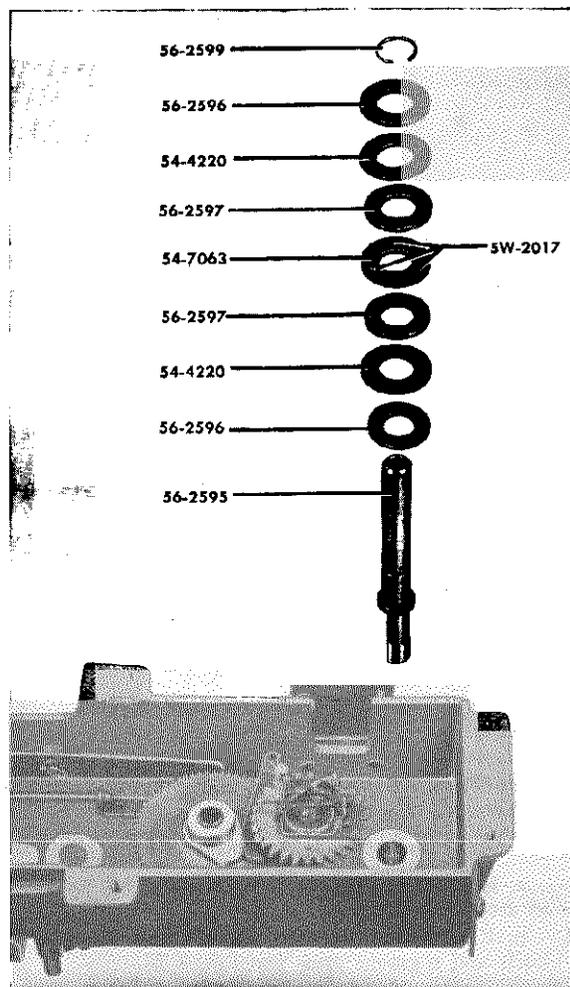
DISASSEMBLY OF TURNTABLE SHAFT AND BEARINGS.
